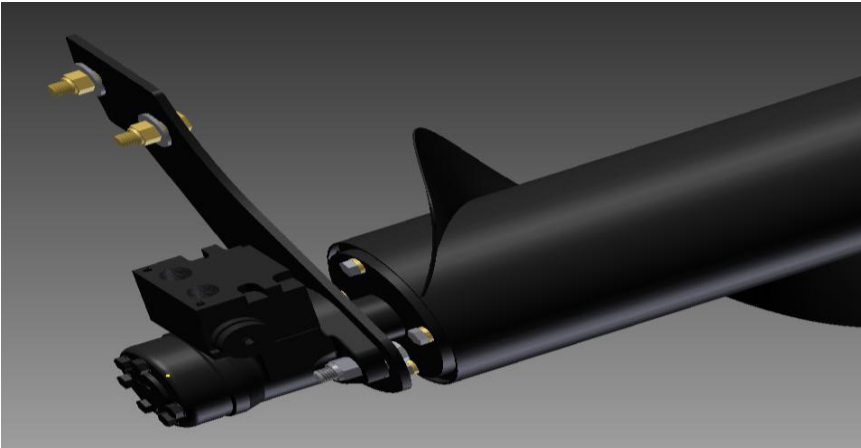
RH END MOUNT ATTACHED TO RH AUGER.
